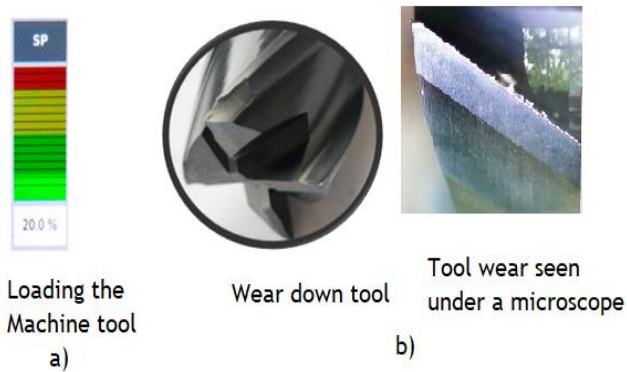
Loading the Machine tool end Wear down tool (strategy Vortex).
